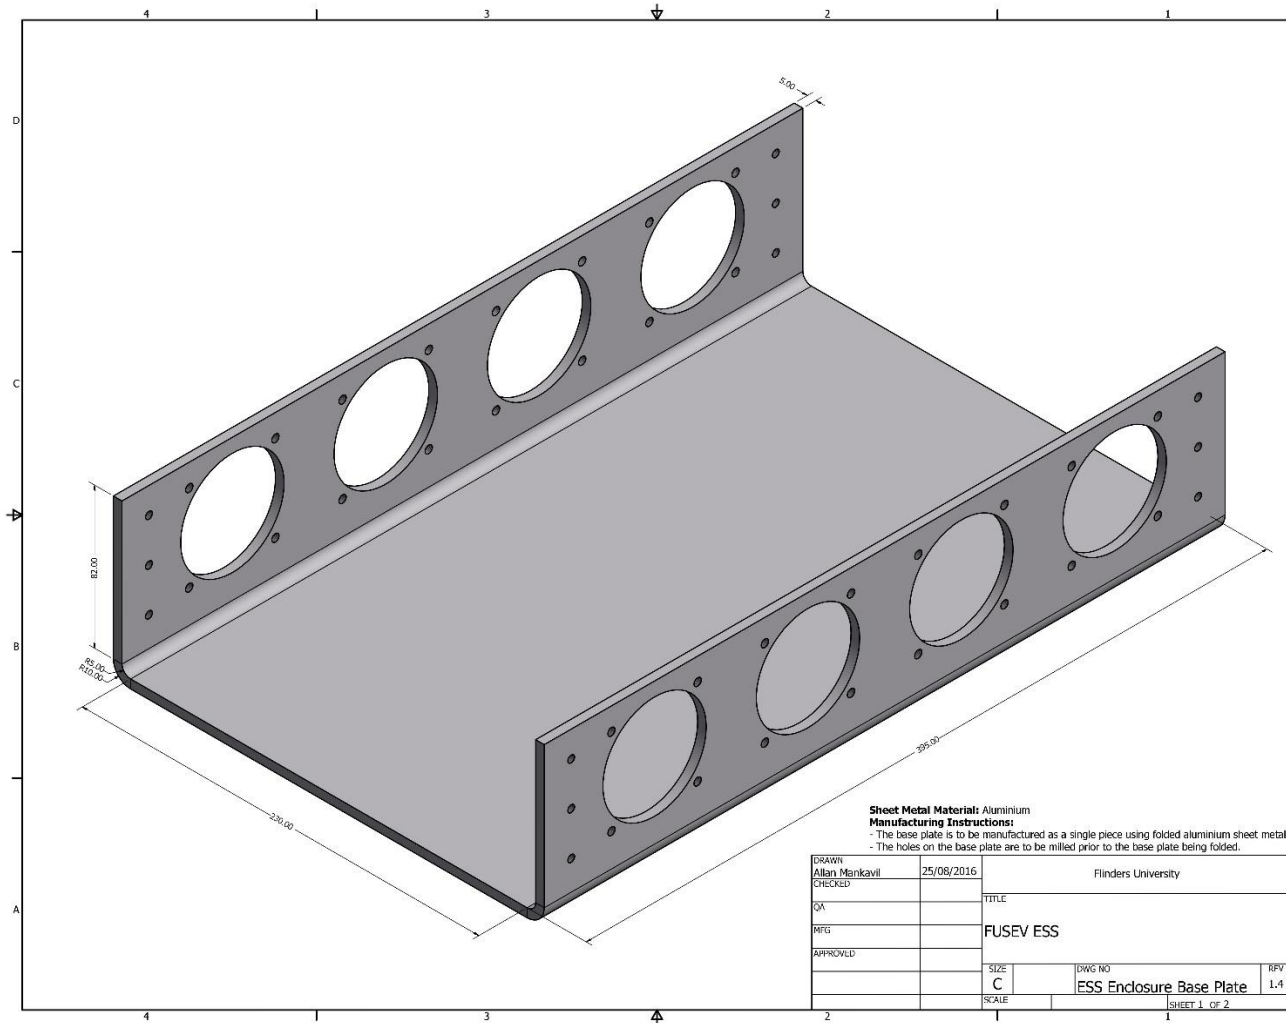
The mechanical drawing of the ESS Enclosure's folded Base Plate.
